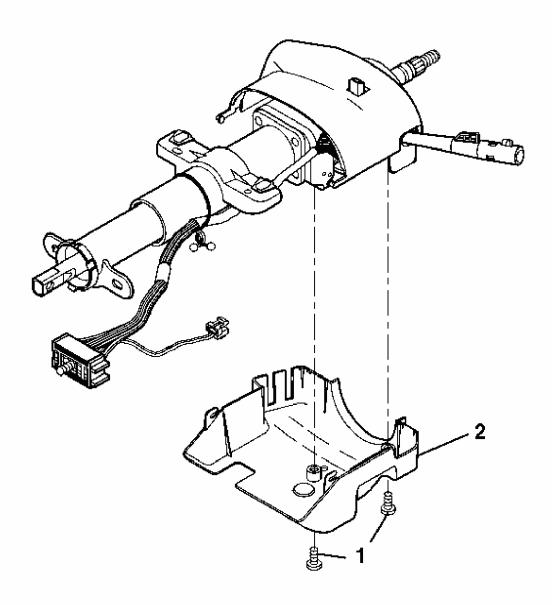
Removing/Installing Lower Trim Cover Courtesy of GENERAL MOTORS CORP.
